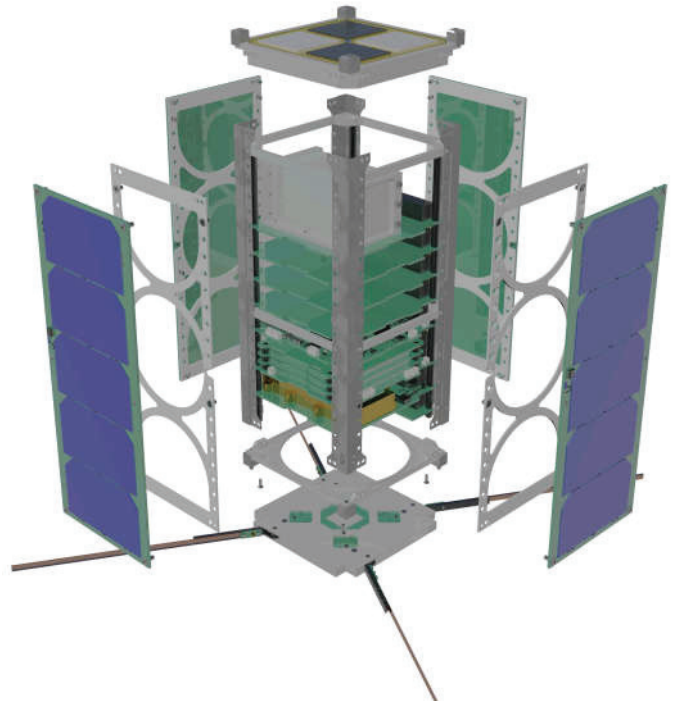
Exploded view of the EIRSAT-1 spacecraft hardware.
